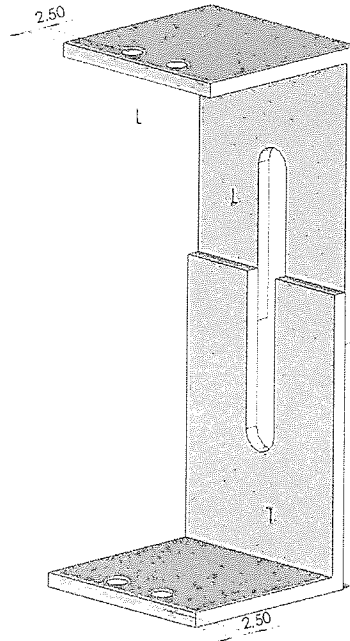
Design drawing of the adjustable sensor bracket.
